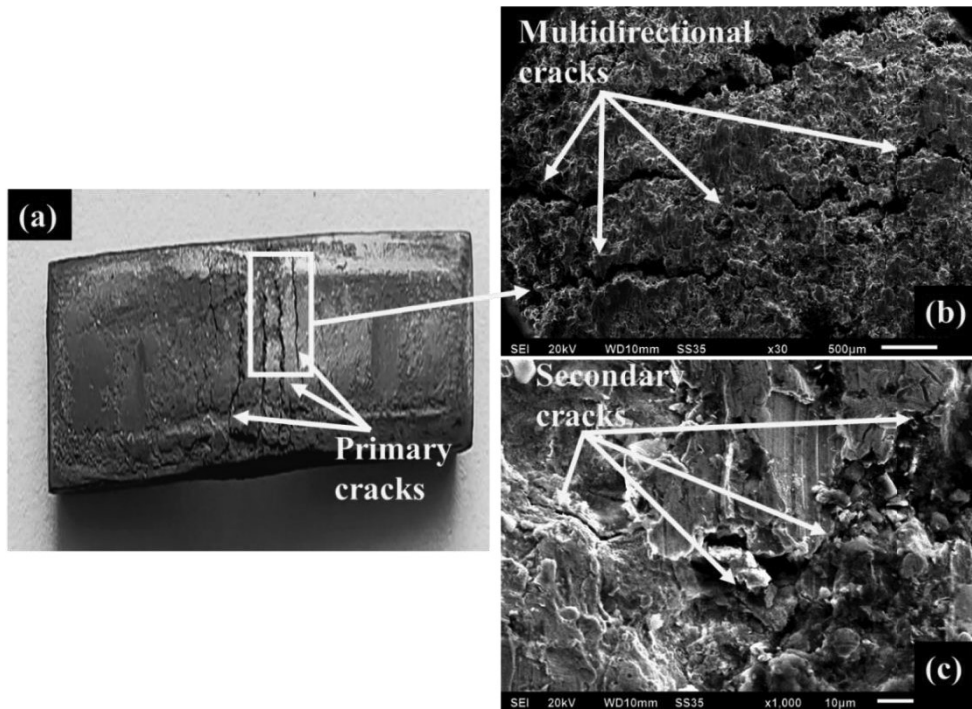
Fractured EWAC-10Al₂O₃ clad specimen after 3-point bend test (a) Photograph of the top surface; SEM micrograph showing (b) primary cracks (c) secondary cracks
